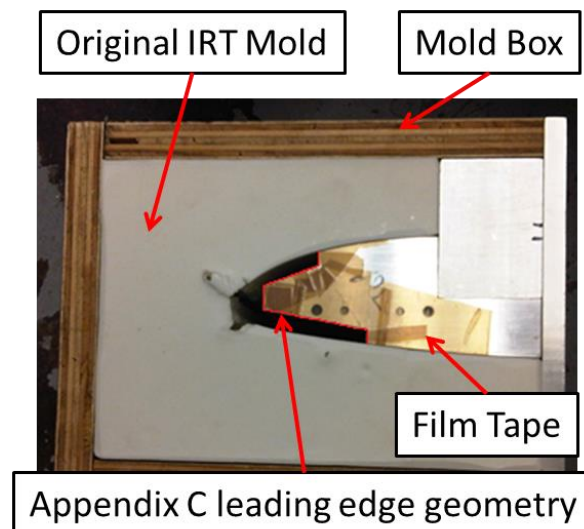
Original mold for horn ice shape, inside a mold box and prepared to make a master casting.
